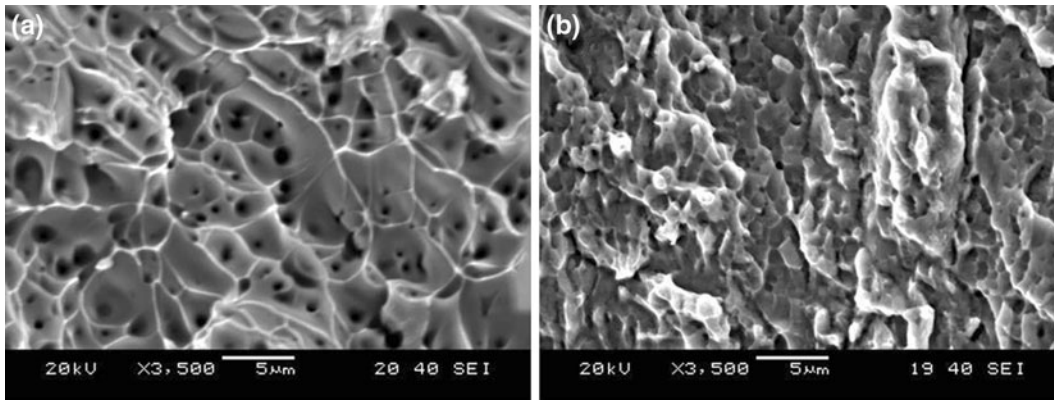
High-magnification SEM fracture surfaces of (a) base and (b) weld metals.
